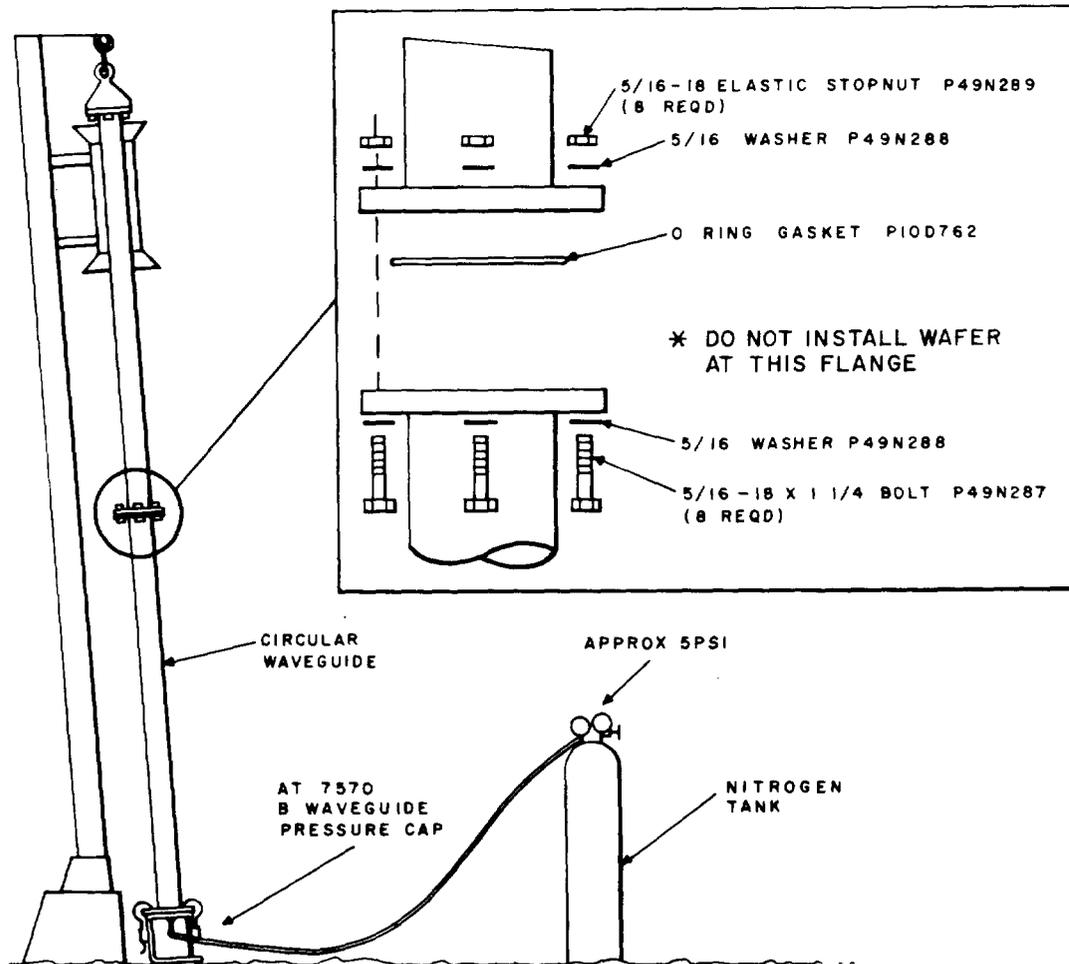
Joining Circular Waveguide Sections—Both Flanges With Integral Gasket Grooves
